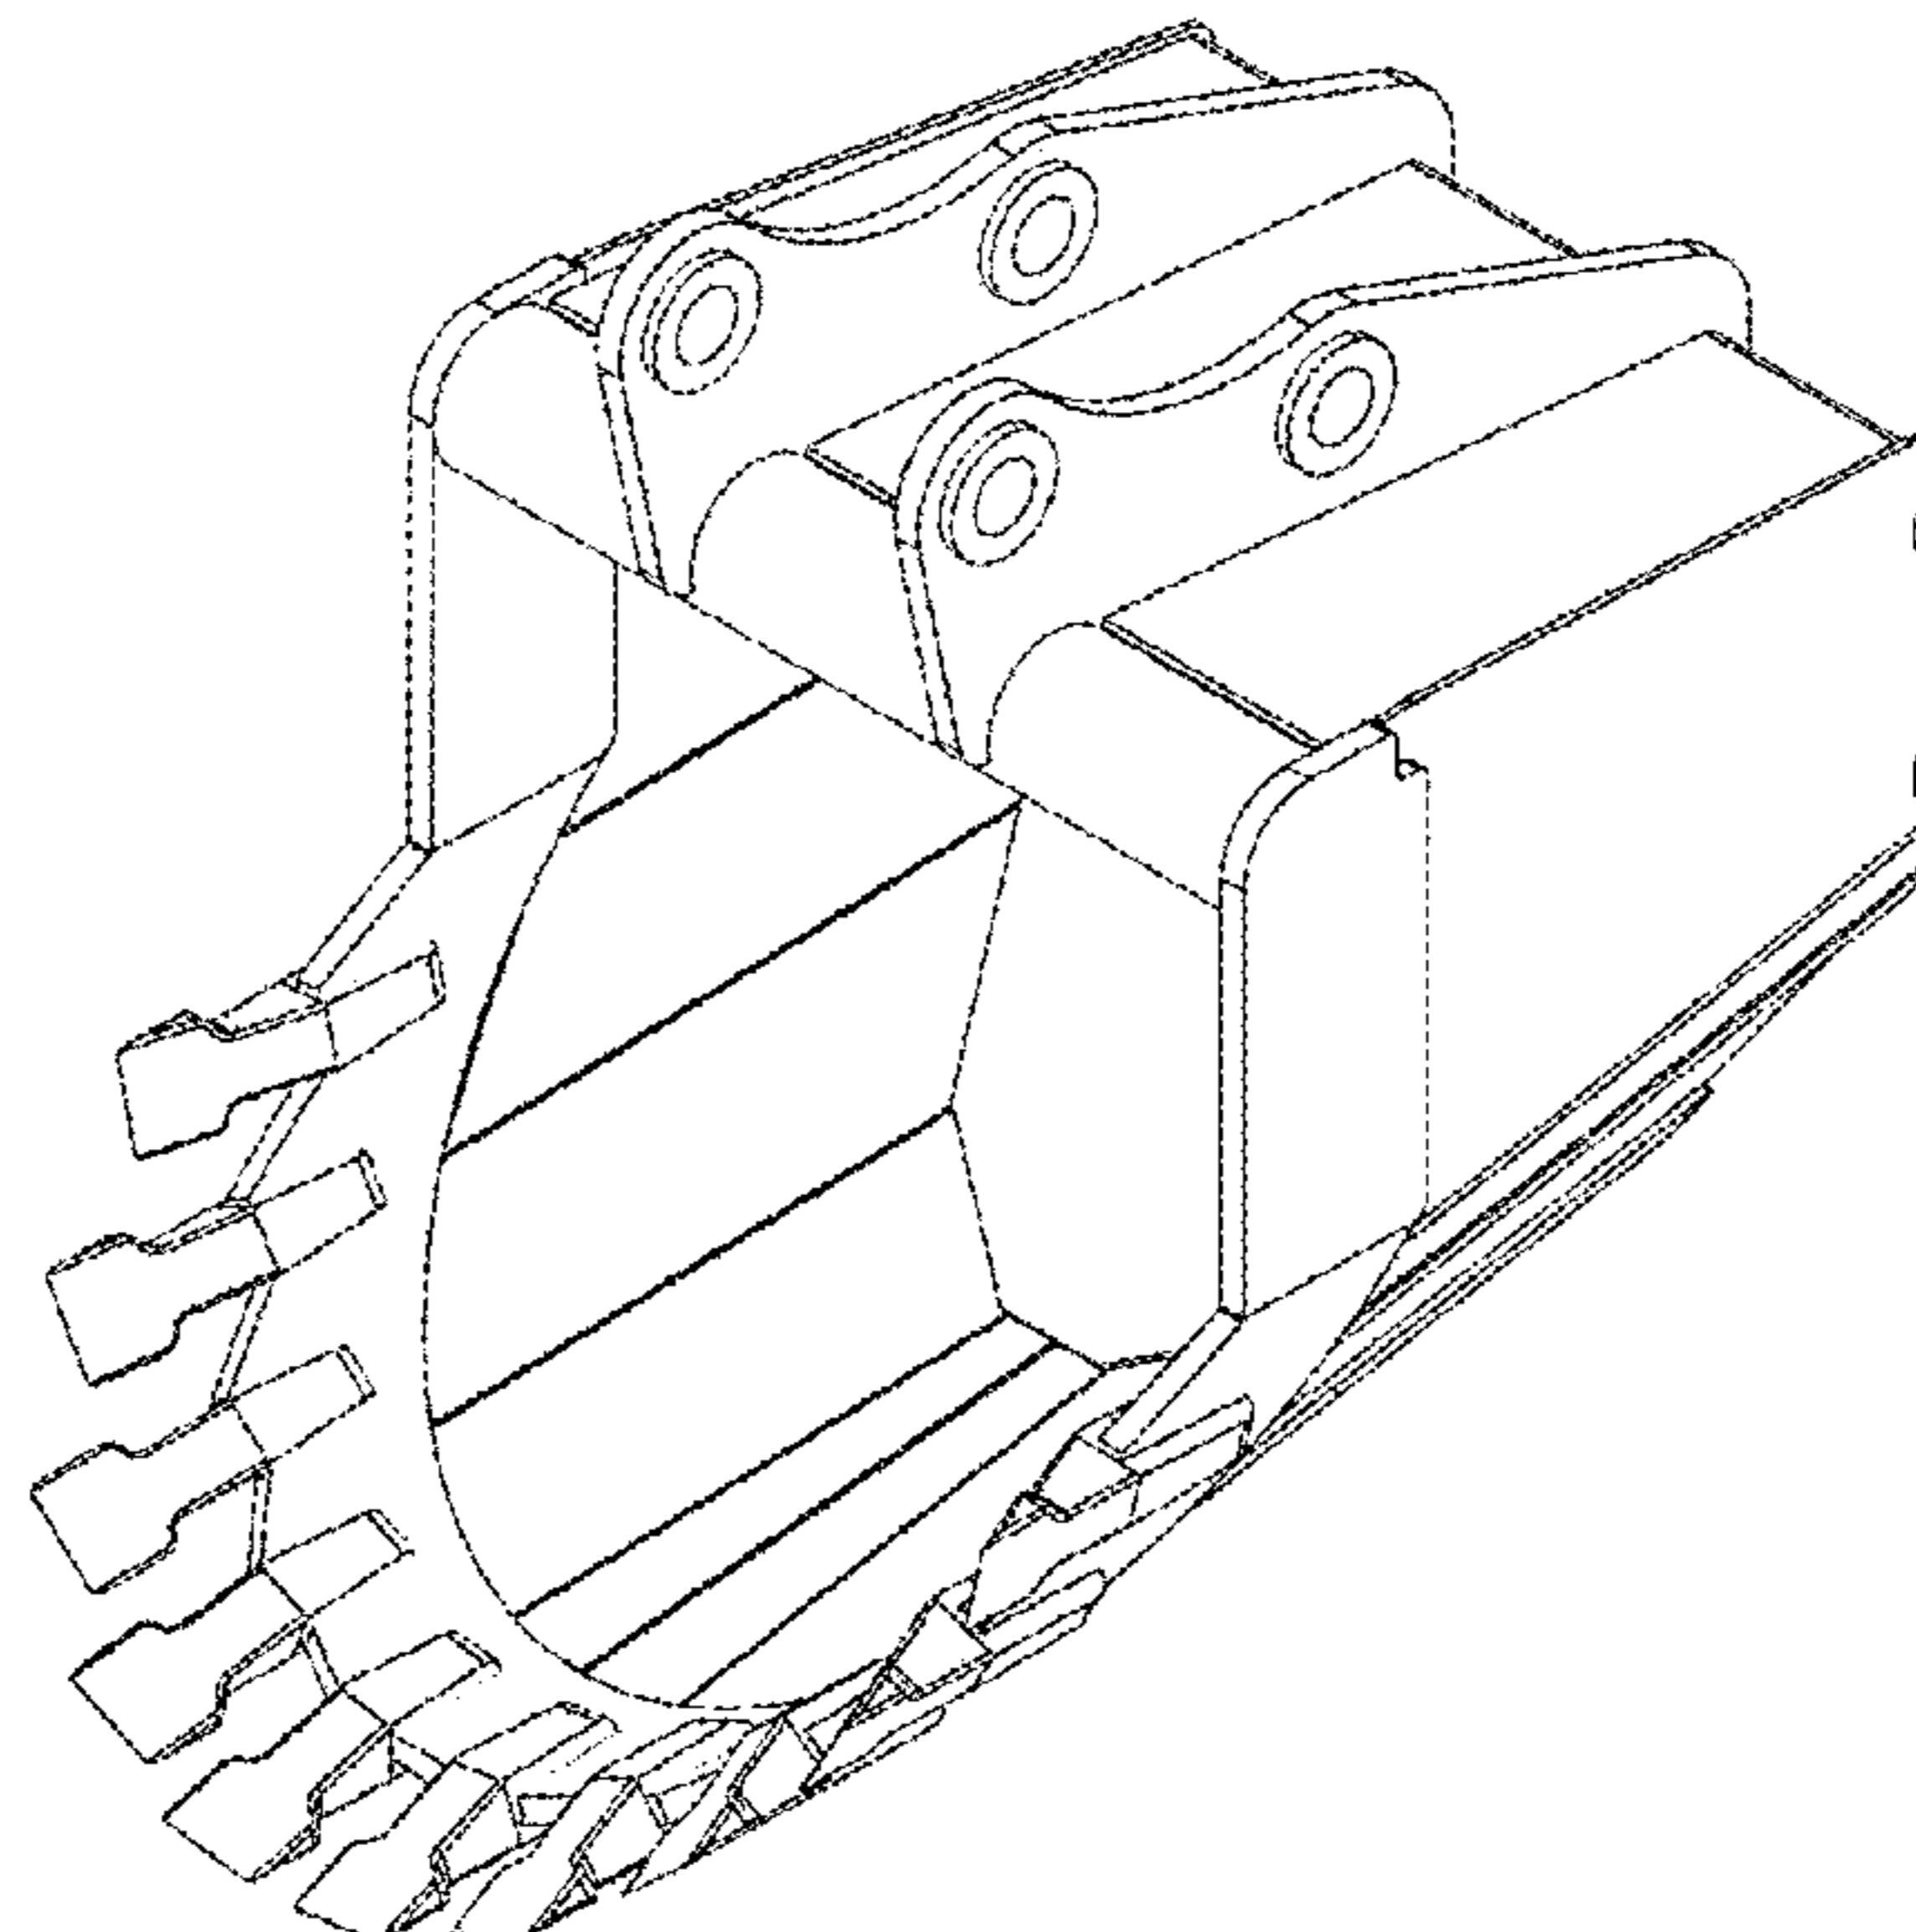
is a front and right side perspective view of a first embodiment of an excavator bucket showing my new design;
